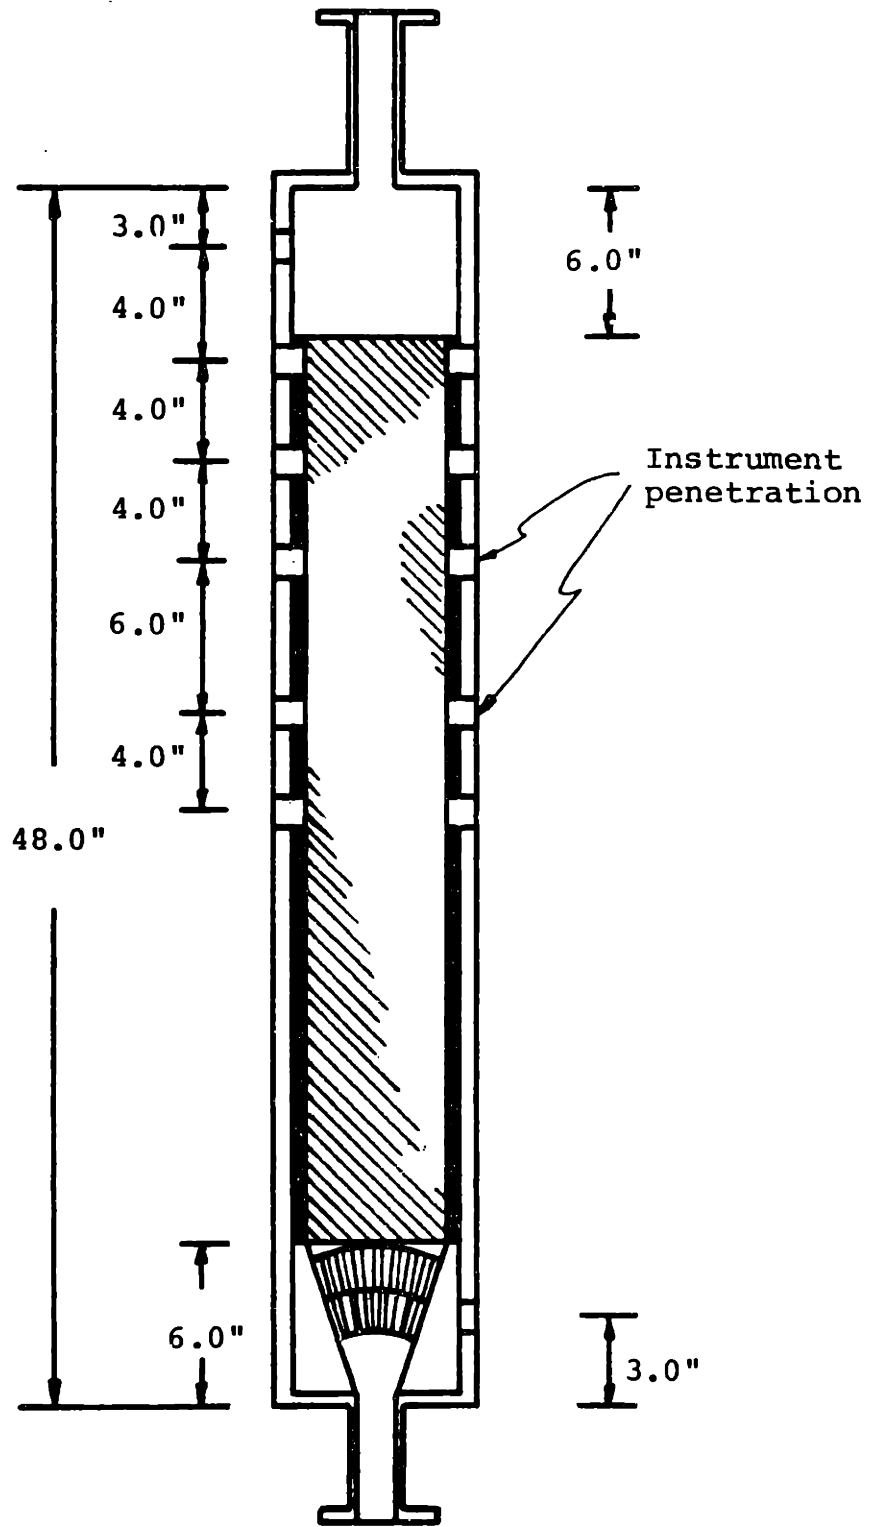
Cross-sectional view of test section/test duct/diffuser assembly.
